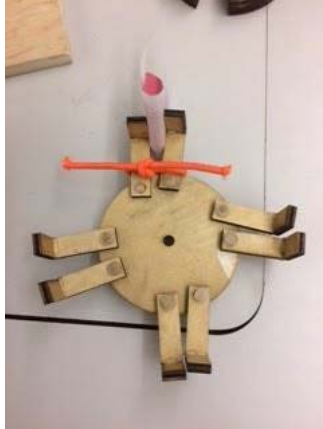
Claw wheel to fold paper around candy and hold candy in place during paper twisting.
